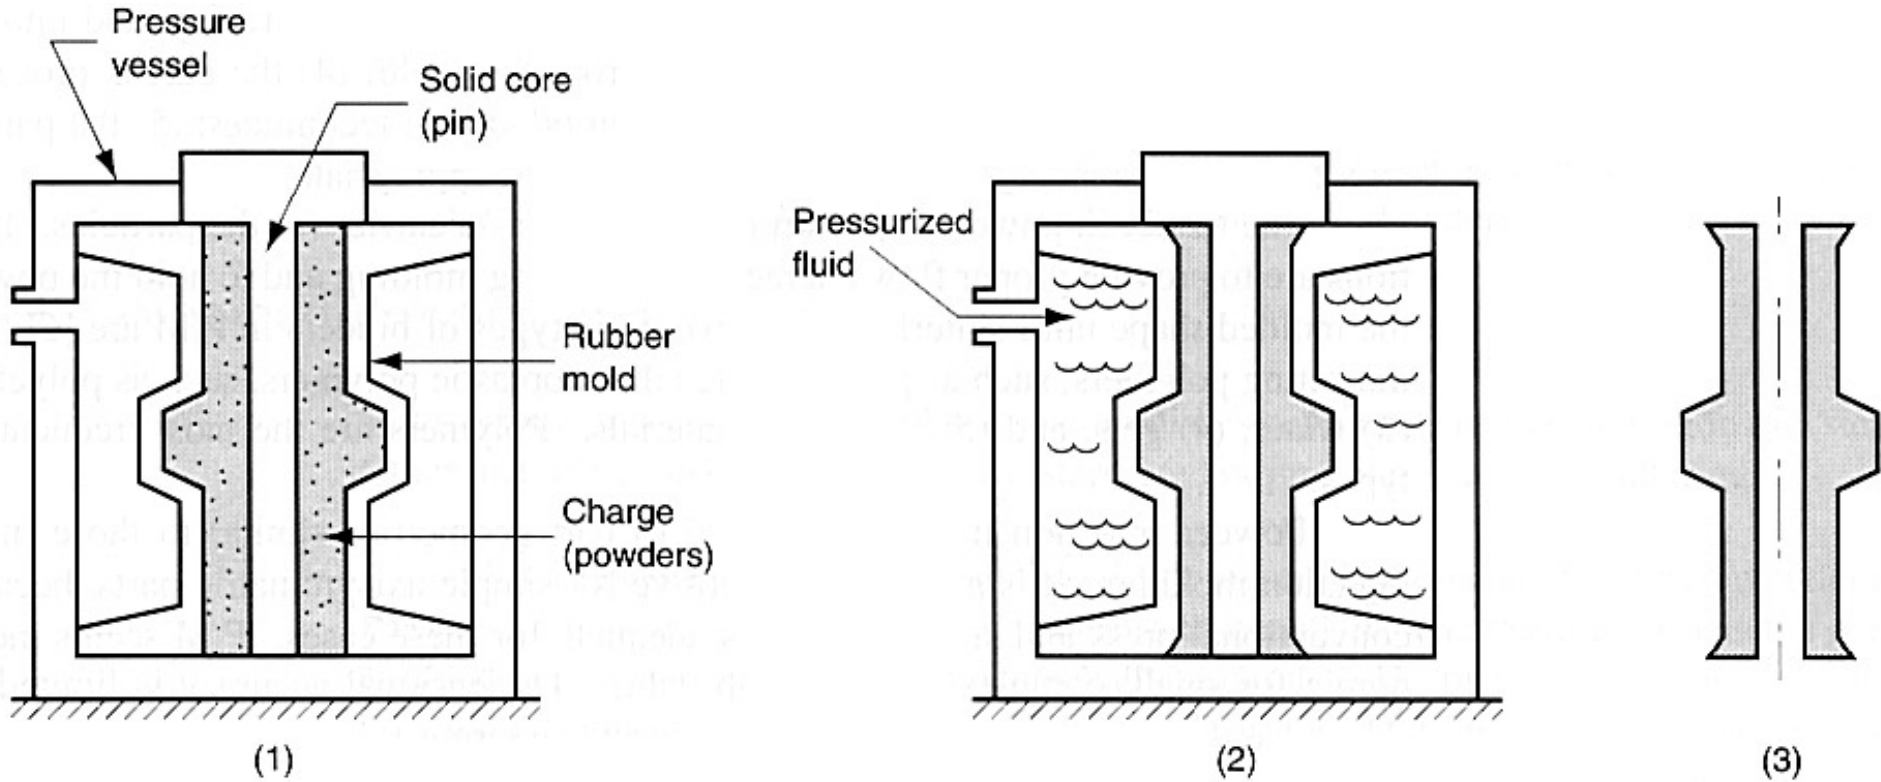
Cold isostatic pressing: (1) powders are placed in the flexible mold; (2) hydrostatic pressure is applied against the mold to compact the powders; and (3) pressure is reduced and the part is removed.
